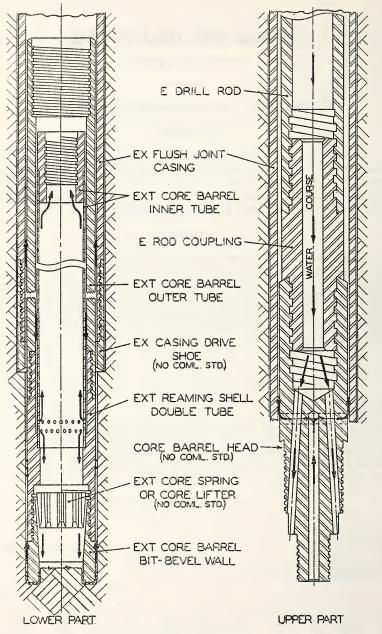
Cross section through rigid-type double-tube core barrel assembly, EXT.
